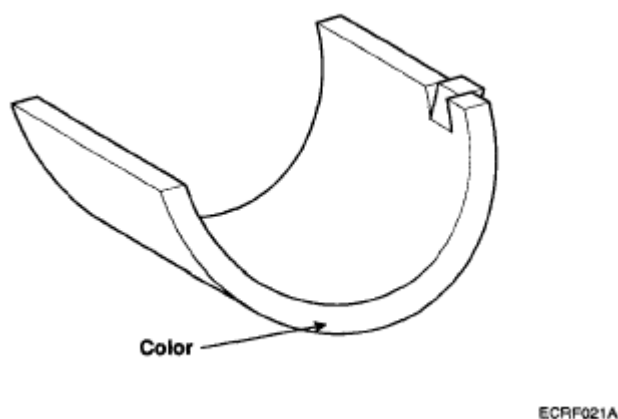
Identifying Exhaust Cam Shaft Bearing Identification Mark
